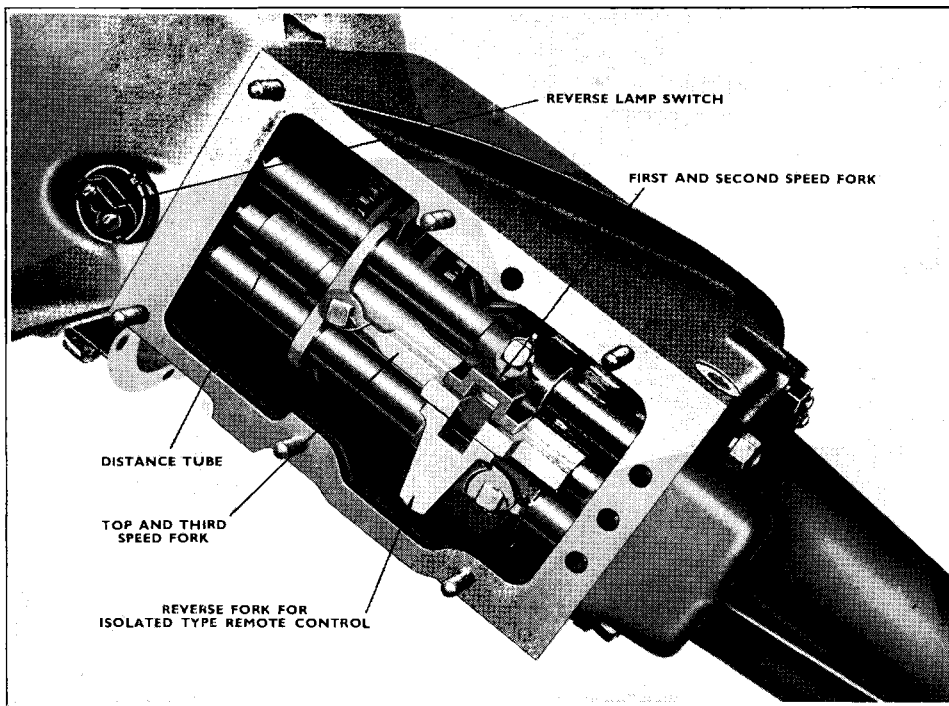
Illustration No. 35.—Gearbox lid removed to show type of selector when “two-piece” remote control is fitted.
